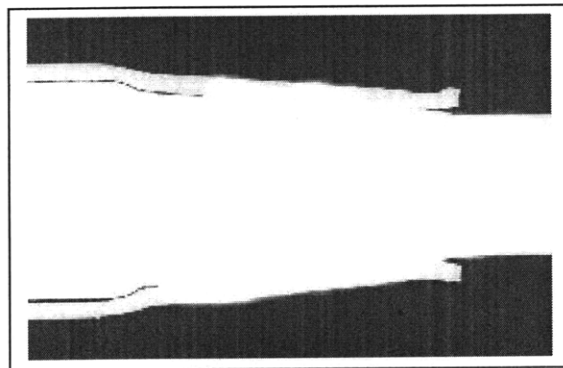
Micrograph of an un-etched section of a welded fuel pin [57].
